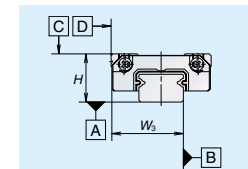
Drawing for accuracy standard (Mounting width  $W_3$ )
